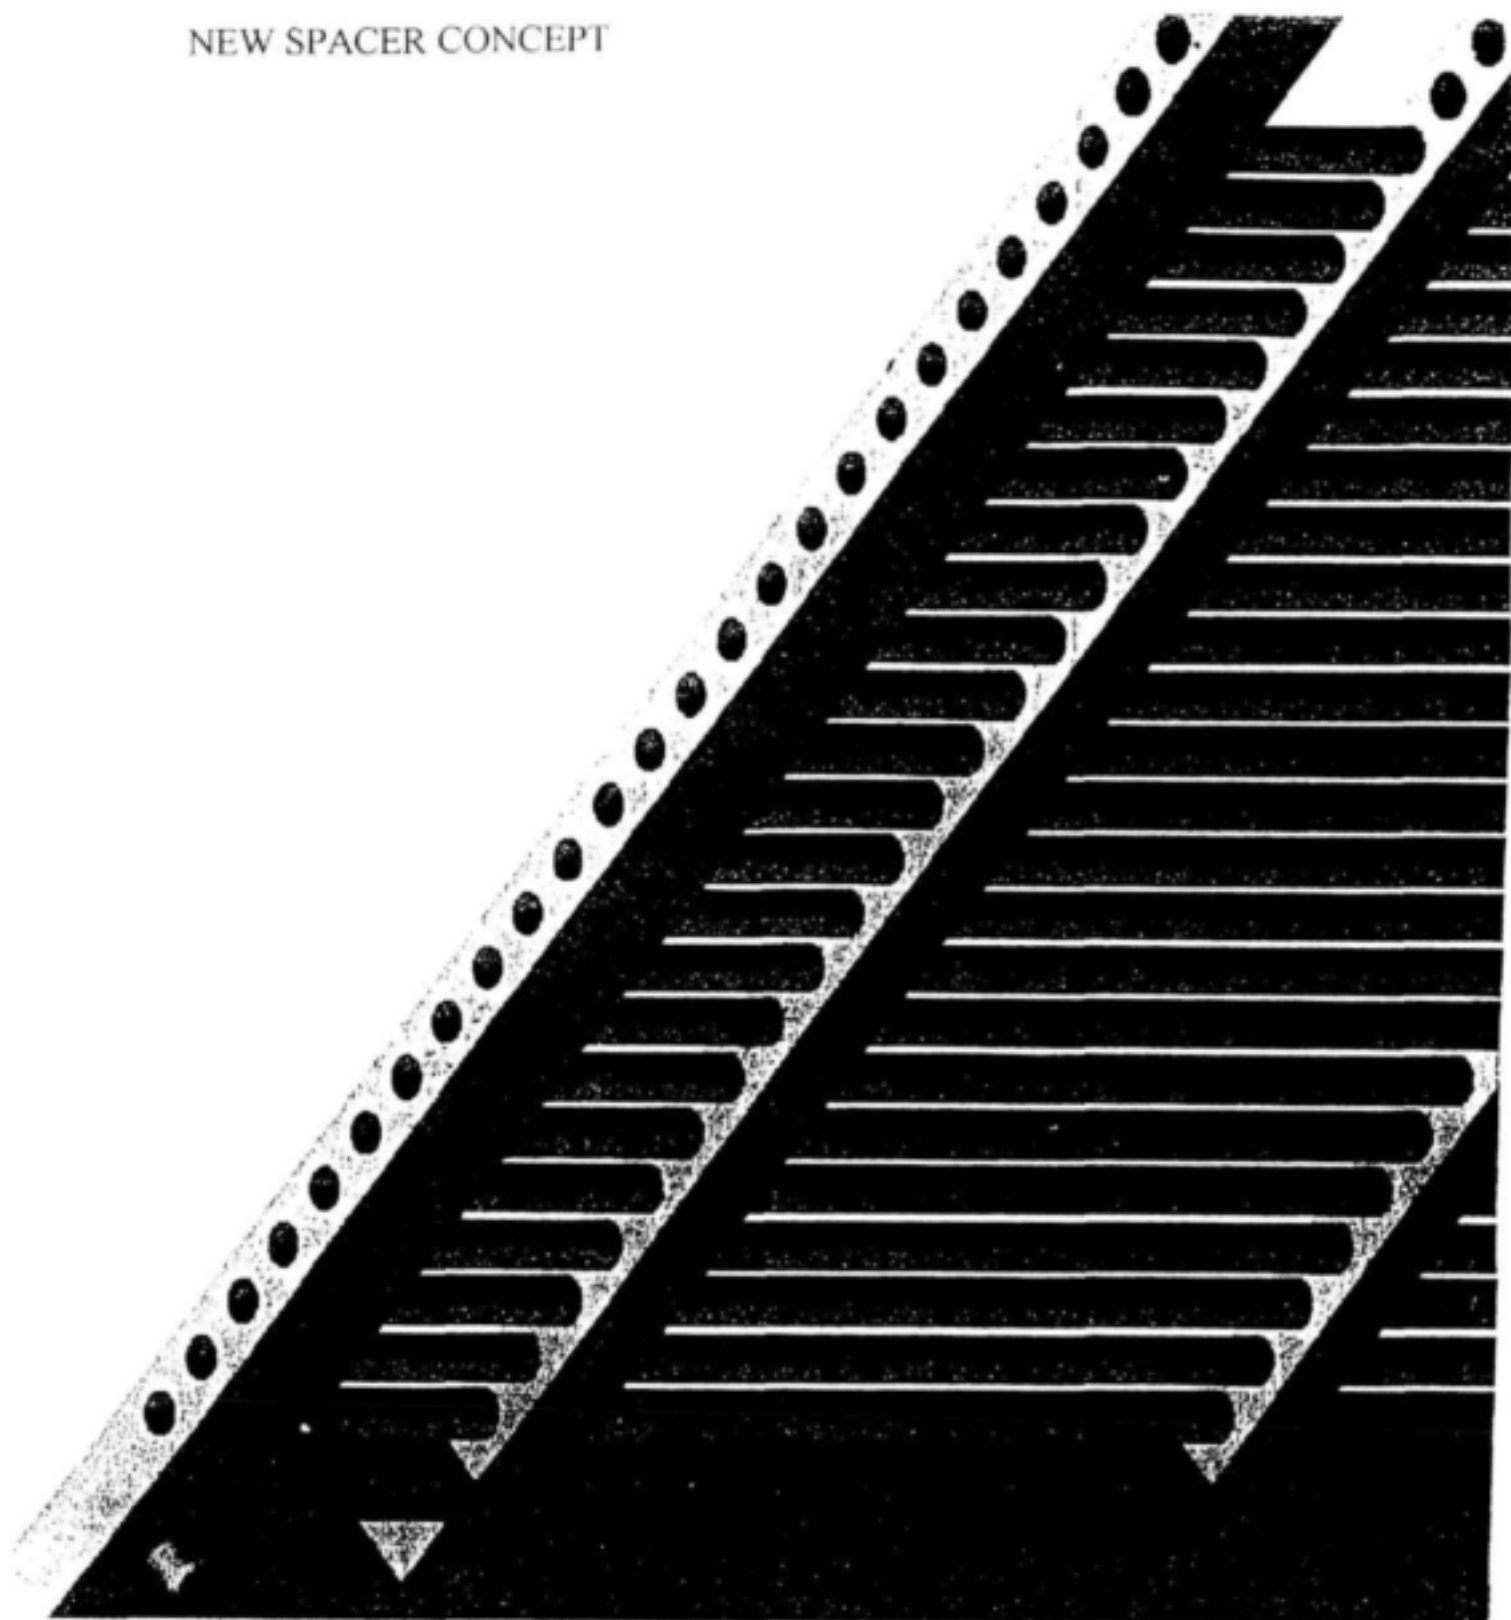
3-DIMENSIONAL DETAILS OF SIMPLIFIED INNER SPACER REDUCED IN SIZE, WITH CAPILLARY LOCATING HOLES AND ASSEMBLY PINS
